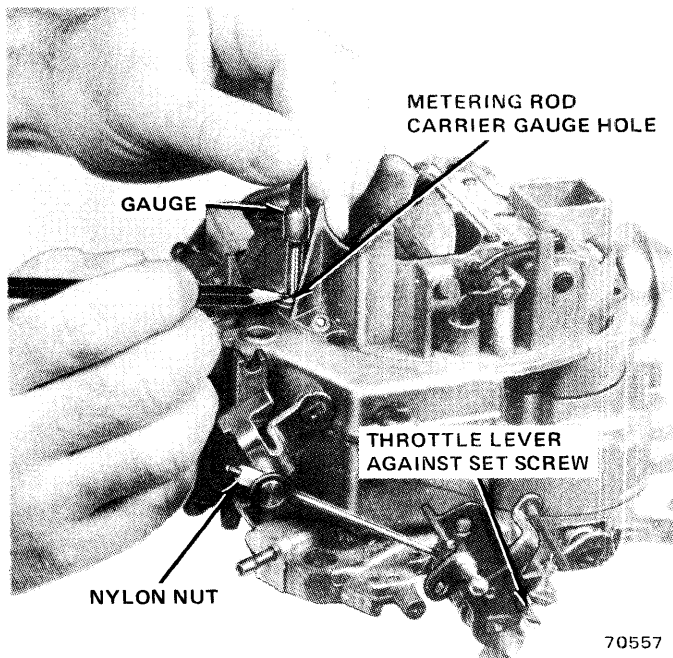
Gauging Metering Rod Carrier Stroke
